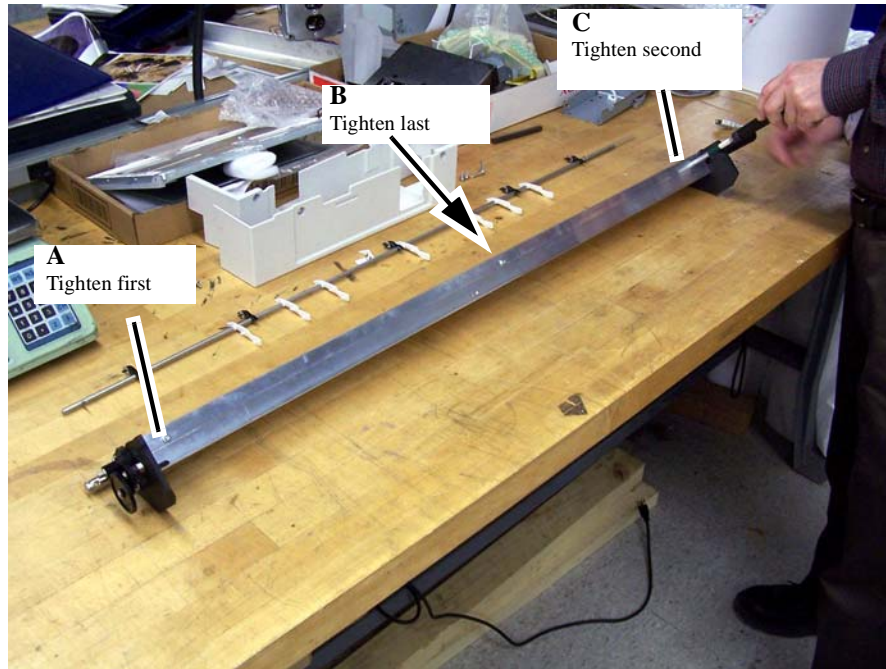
Toner Seal Assembly tightening sequence (A - C - B)
